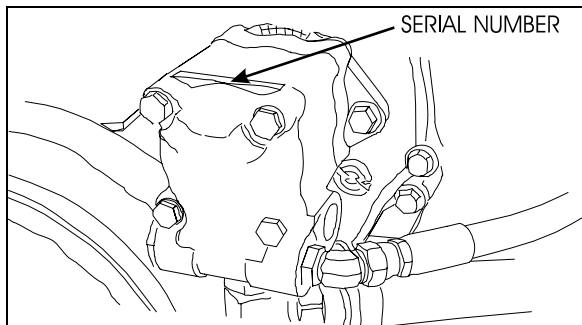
POWER STEERING PUMP NAMEPLATE 00035
